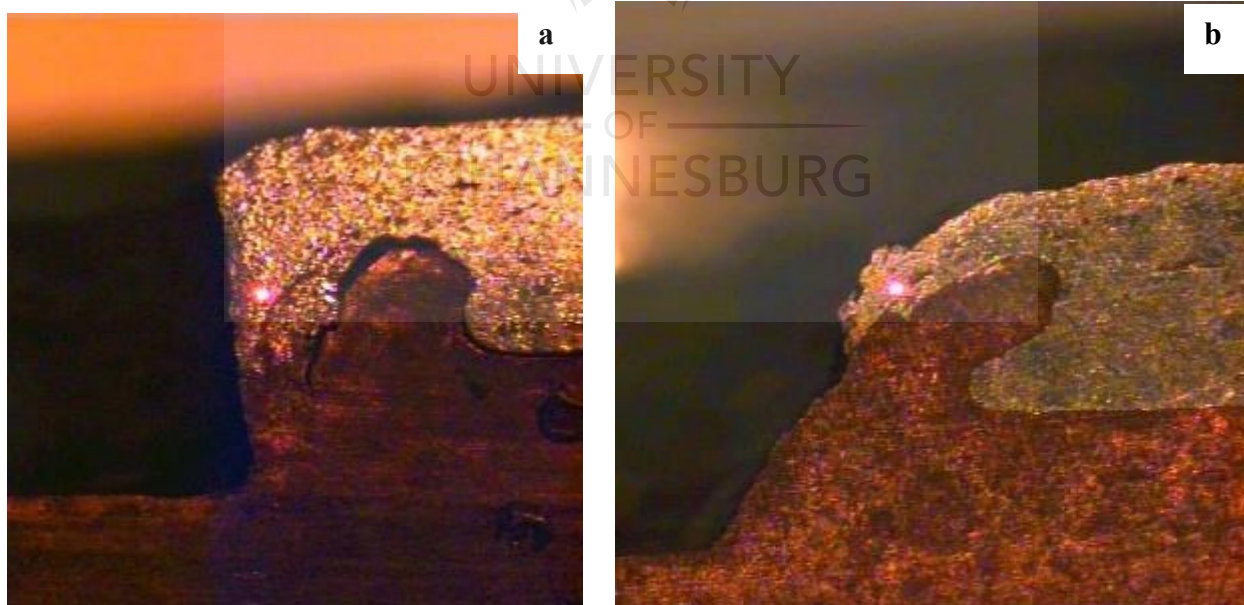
The residual stress measurement position (SZ) of the welds, (a) 800 rpm, 05 mm shoulder plunge depth using a flat pin and flat shoulder, (b) 800 rpm, 0.5 shoulder plunge depth using a conical pin and a concave shoulder
